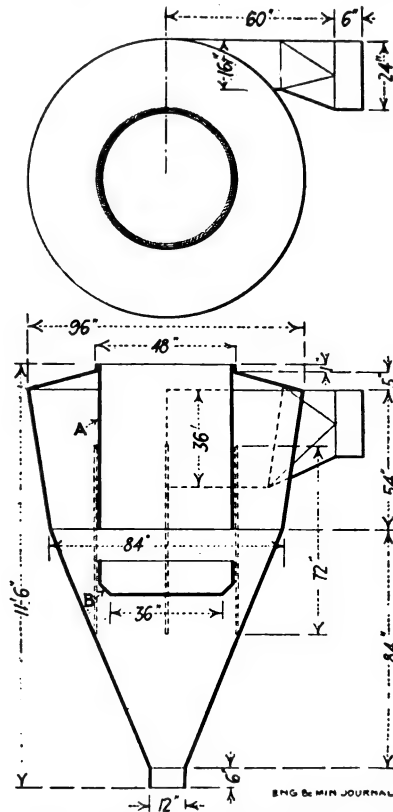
PLAN AND VERTICAL SECTION OF DUST COLLECTOR.
